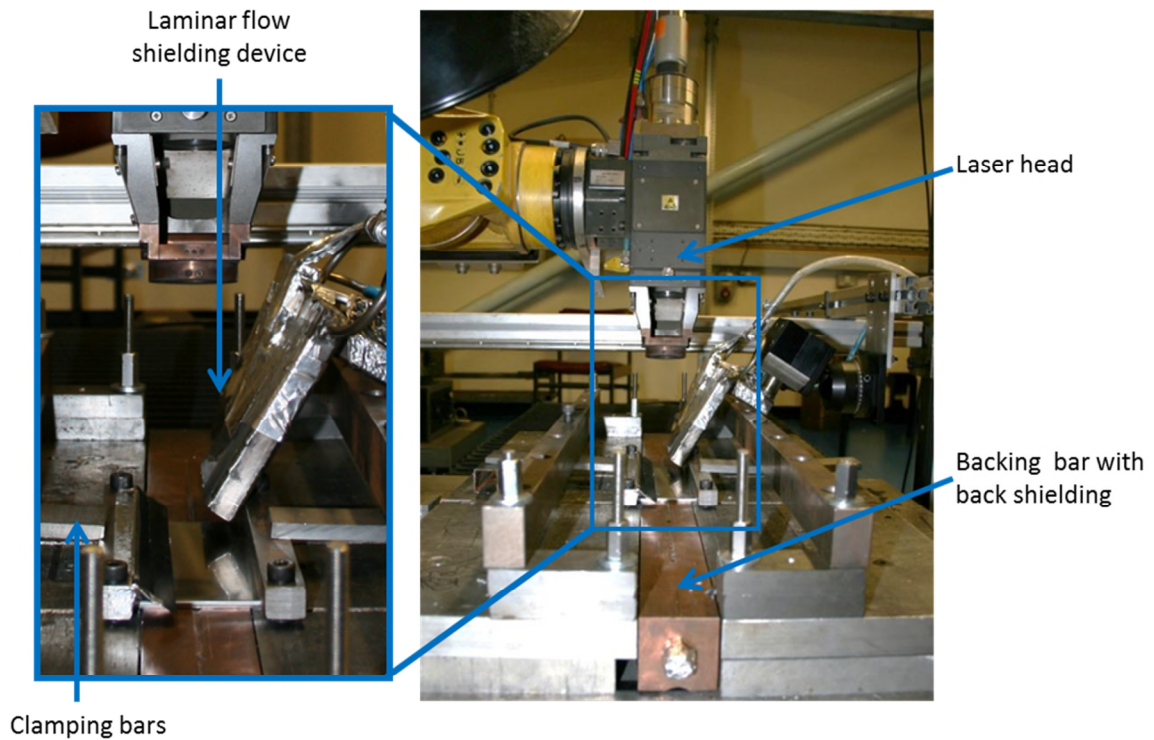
Autogenous laser welding of Ti and stainless steel experimental setup.
